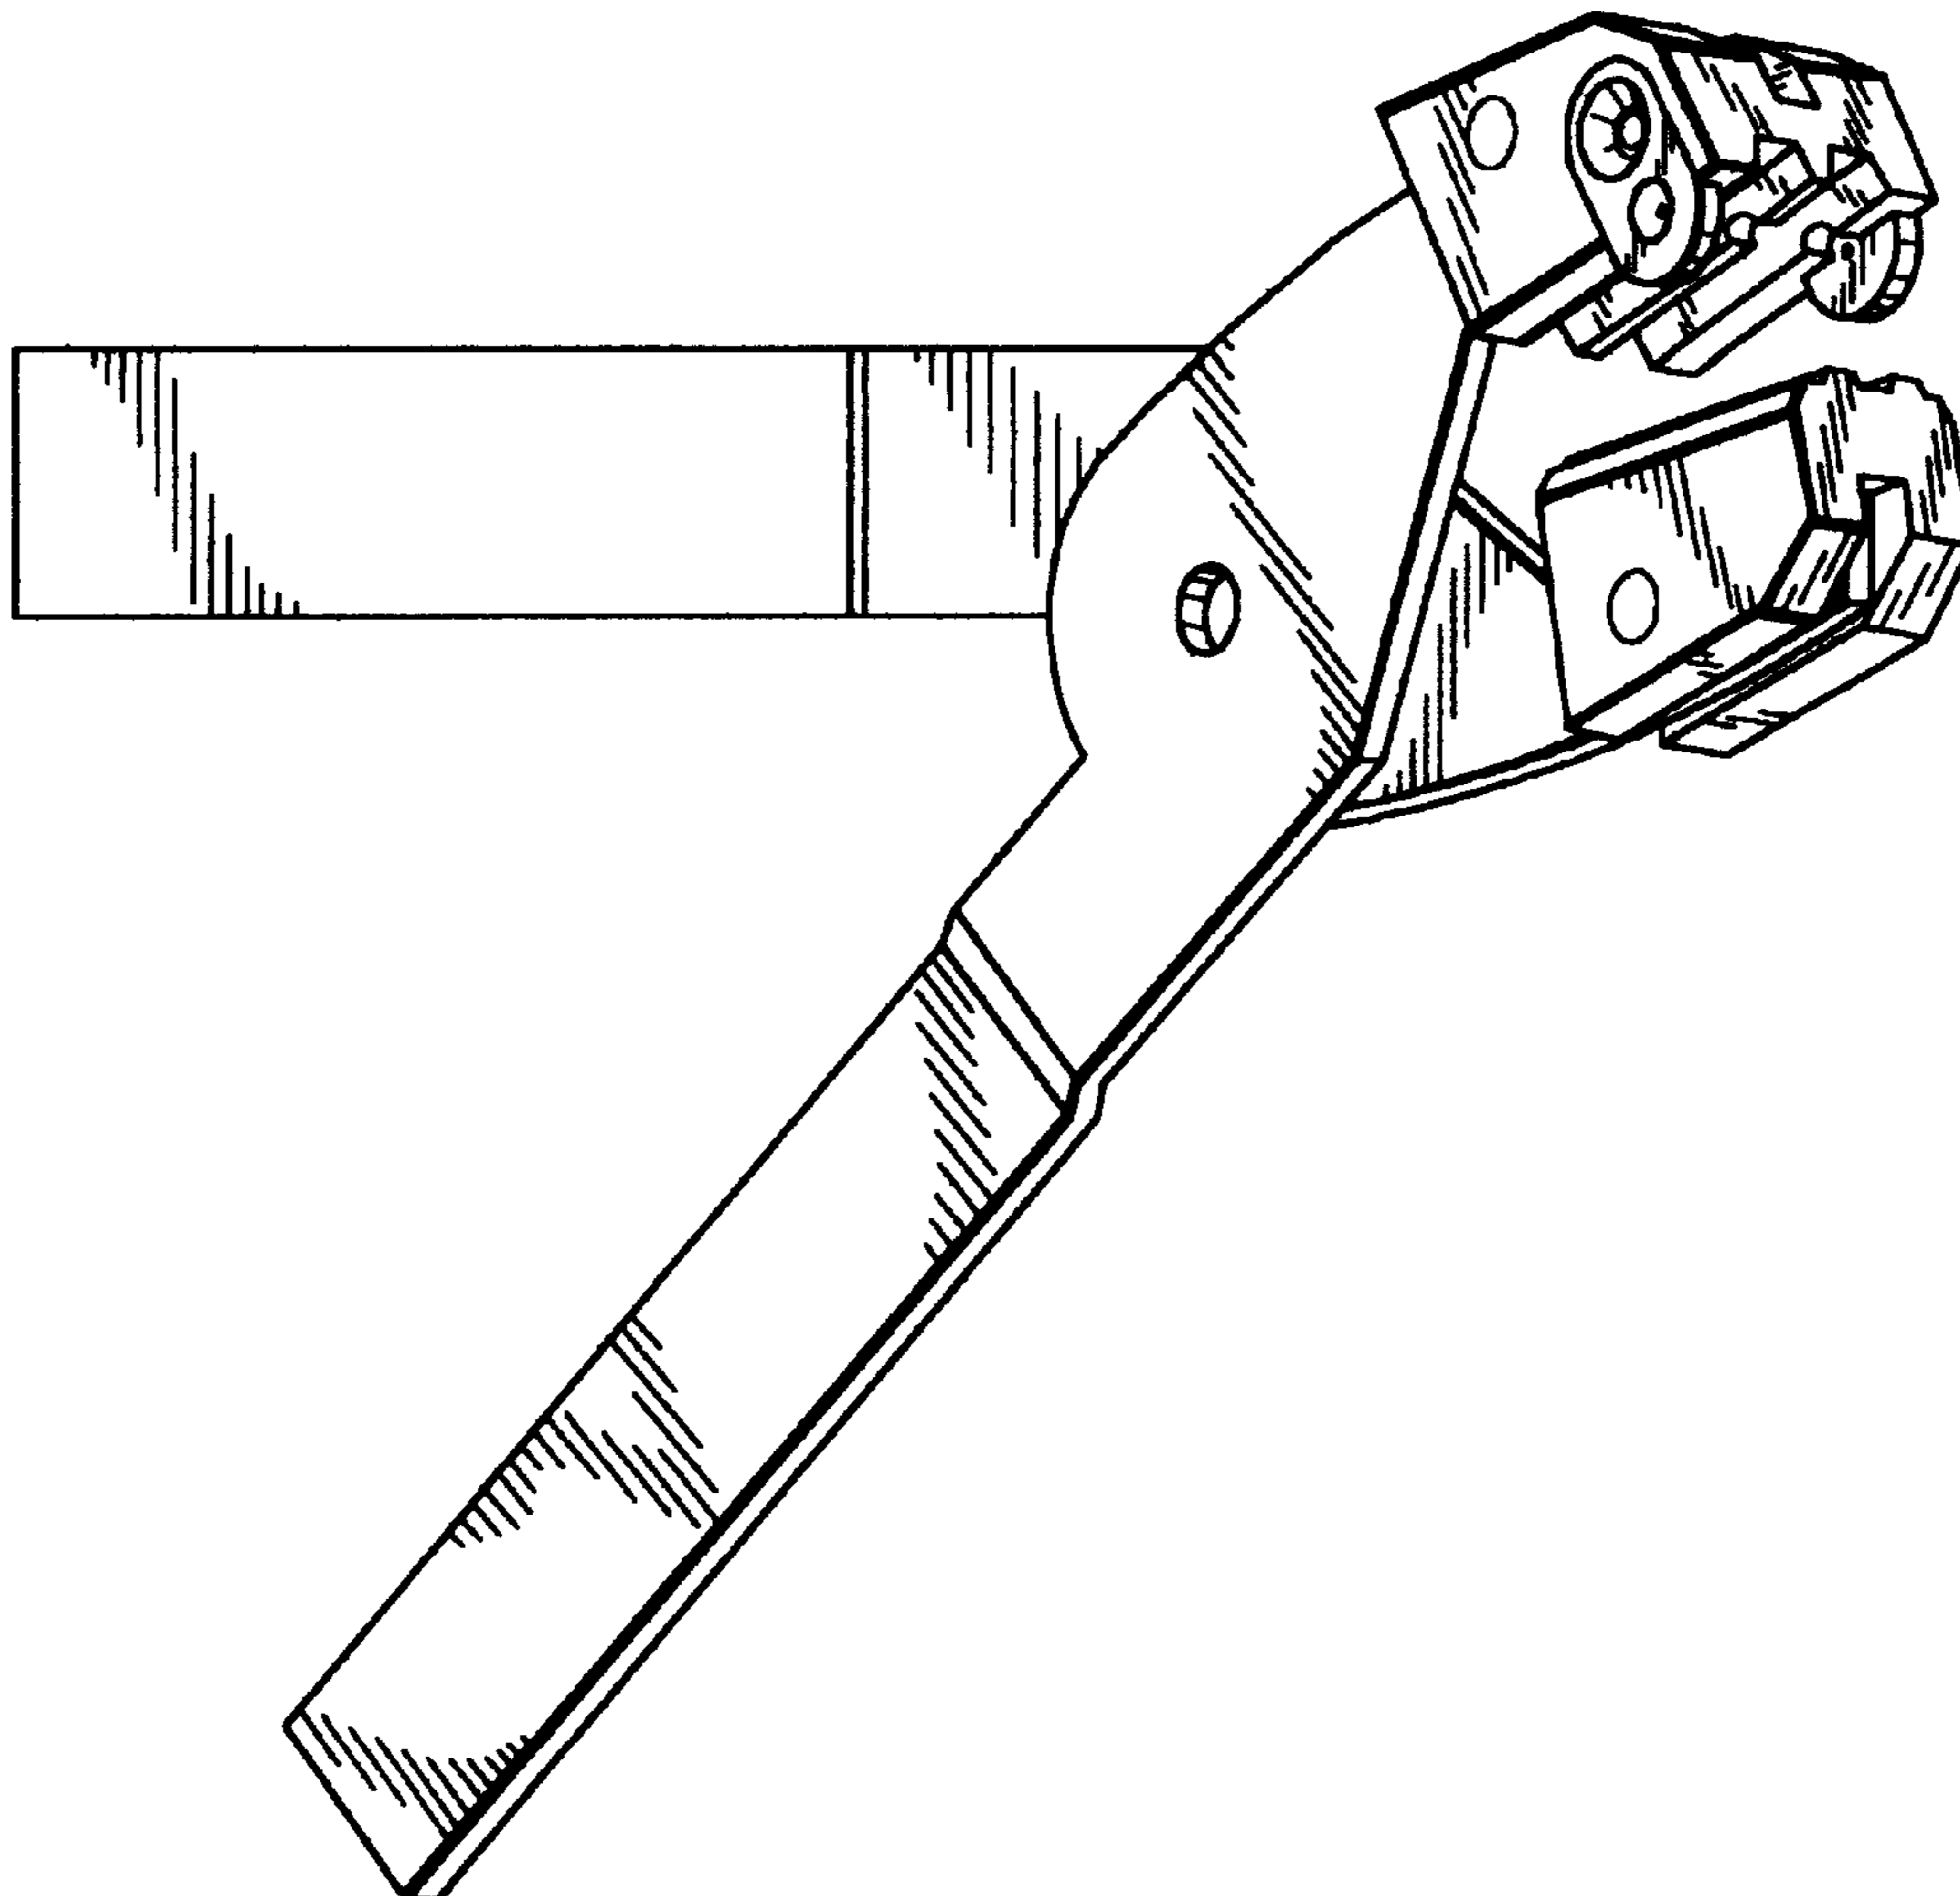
is a right side view of the fishing line fastening tool showing the crimping heads in the open position
